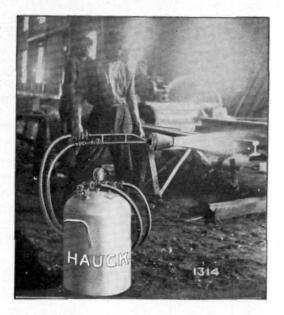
Hauck Portable Heater preheating broken rail in connection with welding. The steel added with welding torch flows like water and amalgamates with steel rail quickly without making hard spots.
